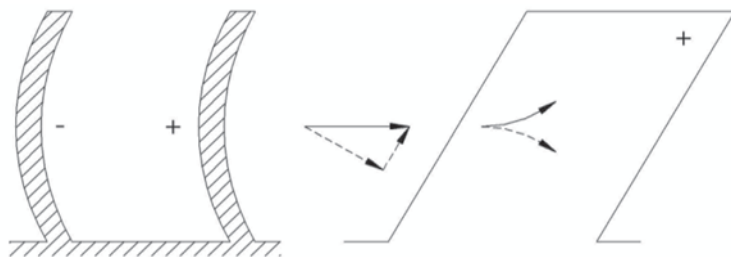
Bowing of a blade (*left: front view*); sweep of a blade (*right: side view*)
